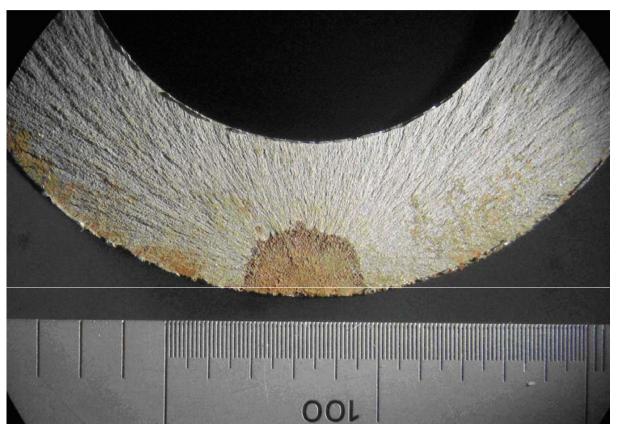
Photo 2, A magnified view of the fracture surface showing the Chevron pattern at the origin of the fracture
